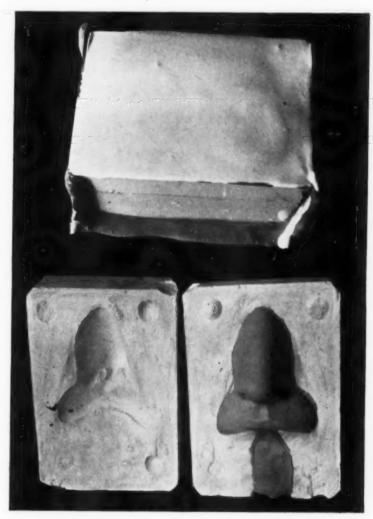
A. The filled glass box constituting the completed two-piece mold.
